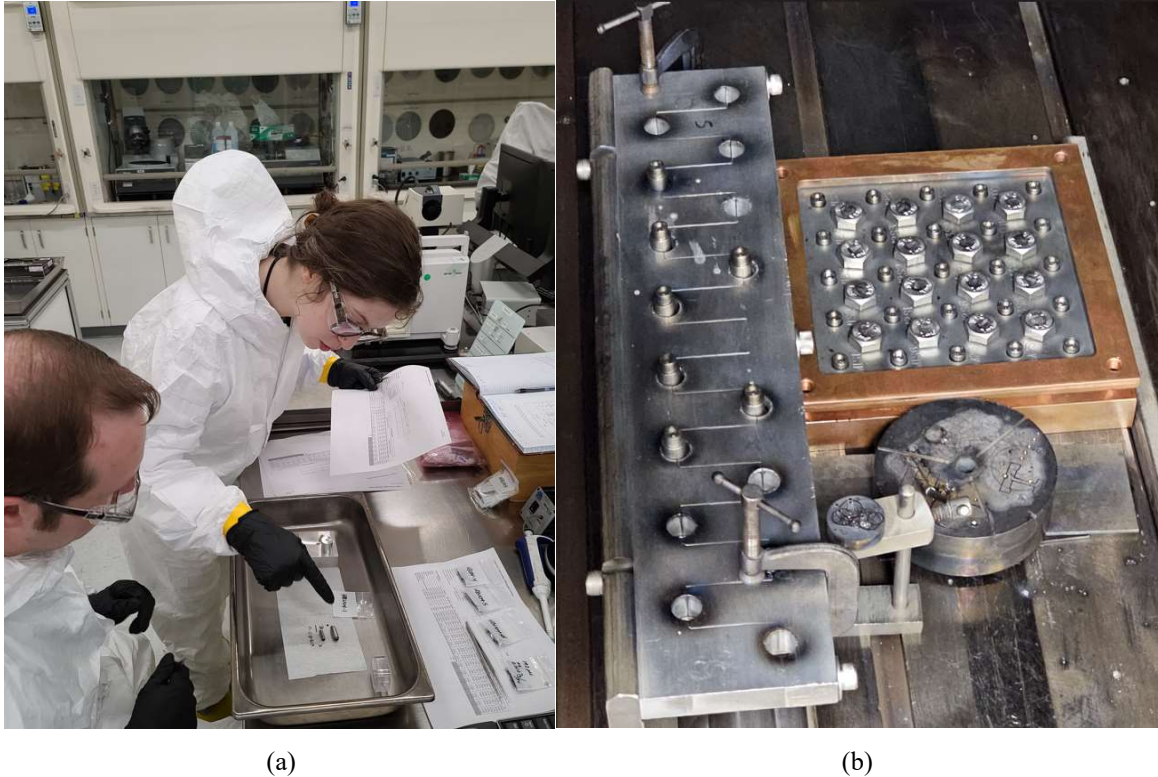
Subcapsule assembly step (a) and assembled subcapsules loaded into the fixture for electron beam welding (b).
